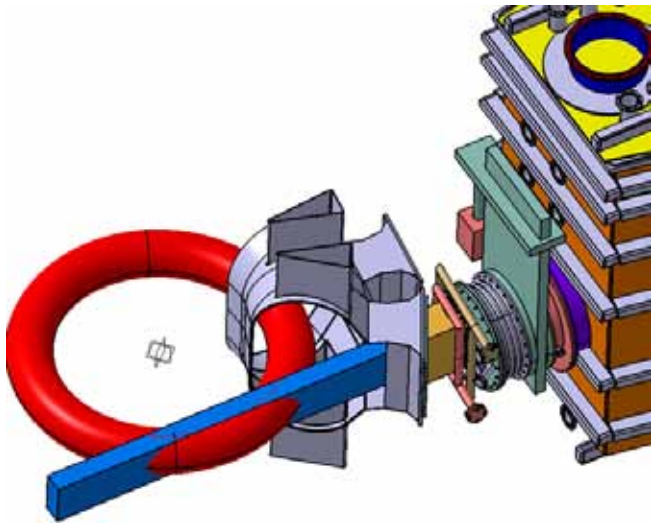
3D view depicting the assembly of beam transmission duct and beam injection geometry
